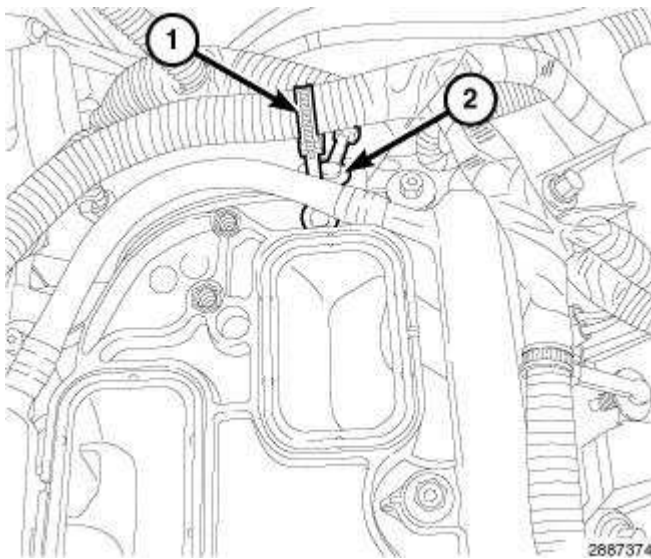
Injection/Ignition Harness Retainer & Main Wire Harness Retainer
